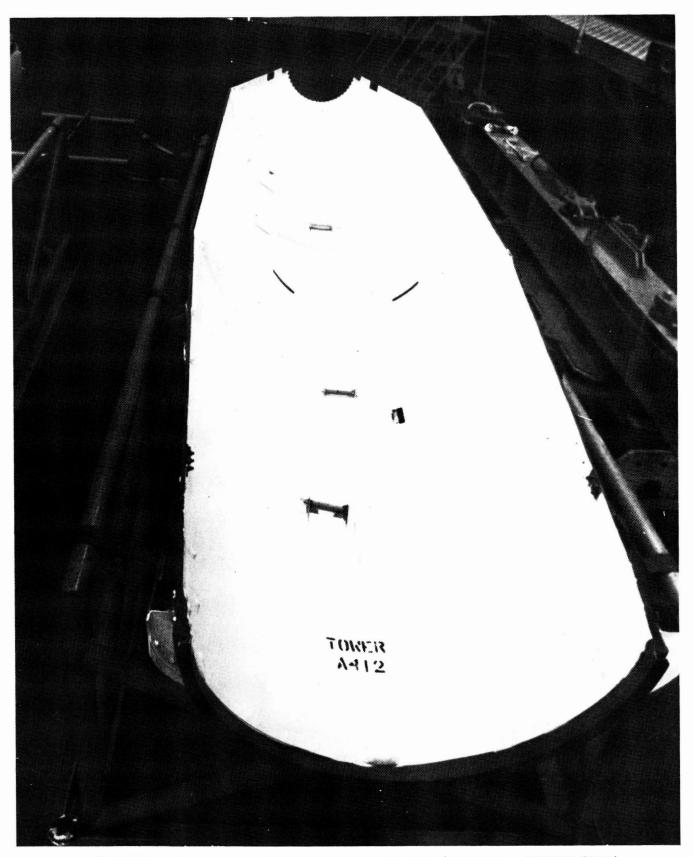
TYPICAL HEATSHIELD ASSEMBLY (SHEET 1 – TOWER SIDE)
